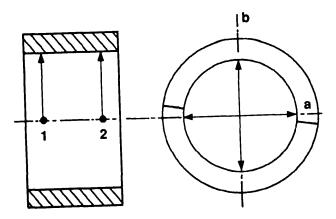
Checking Pre-loading of Engine Bearing Bores.
